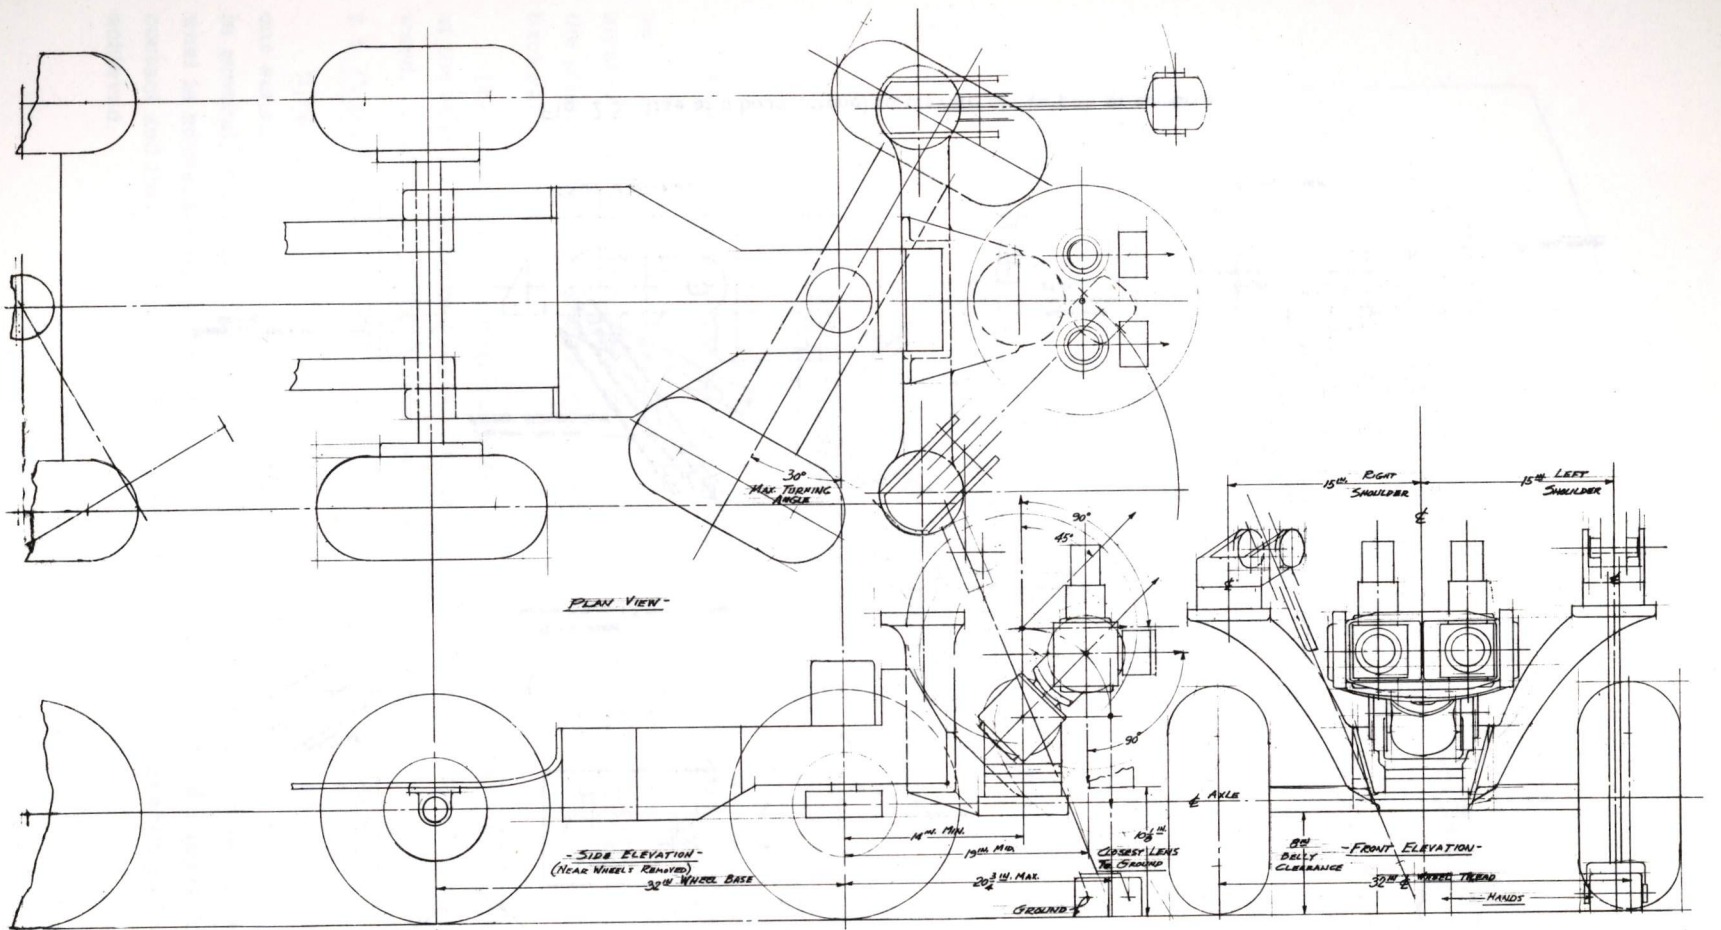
Camera assembly E mounted in front of forward axle of General Motors six-wheeled vehicle.
